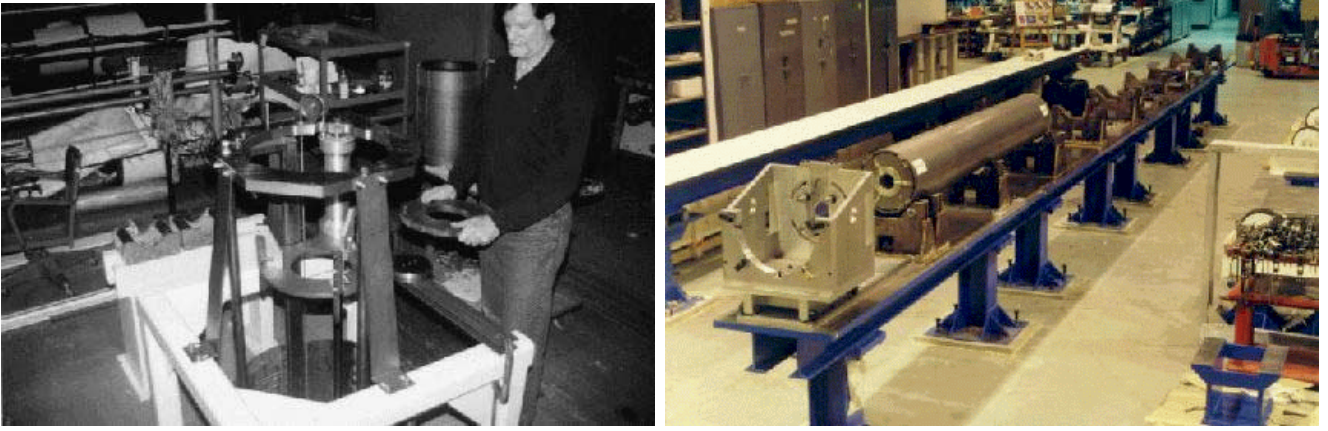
Left (a): Lamination stacking fixture. Right (b): Alignment table for assembling the cold mass of a complete snake or rotator. The first helical dipole is shown at the near end.
